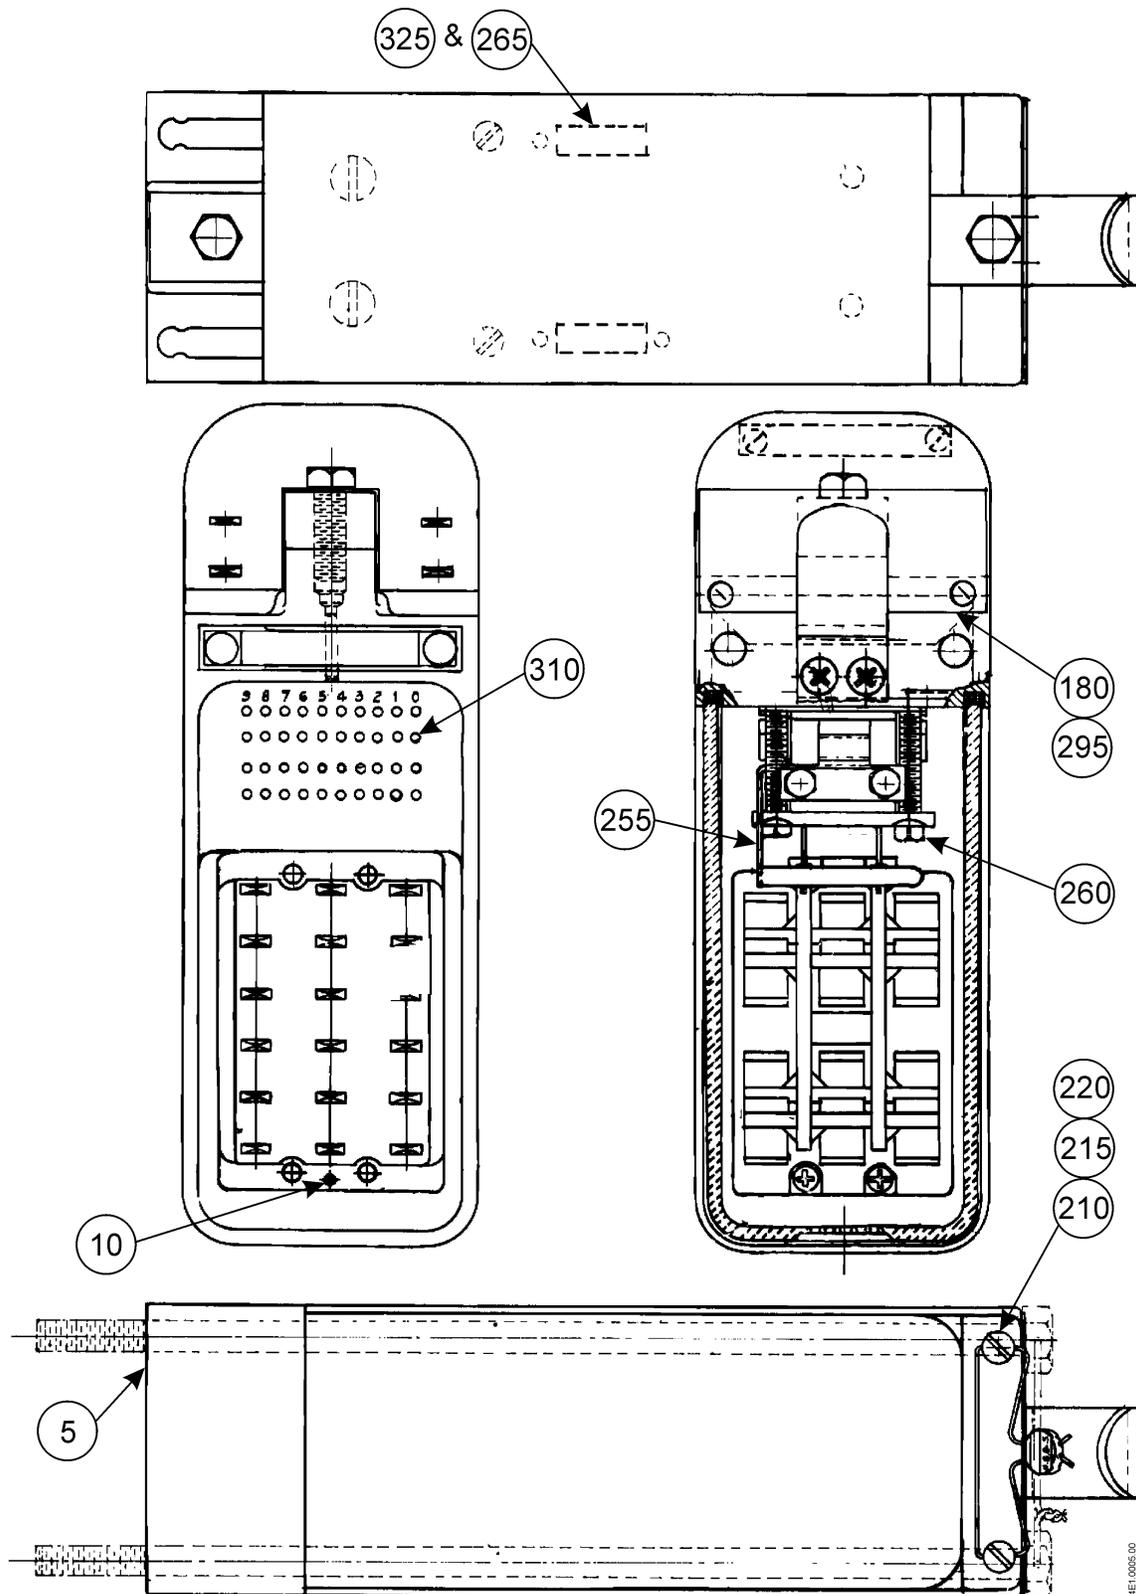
PN-159B Relay Parts Detail (Sheet 2)
